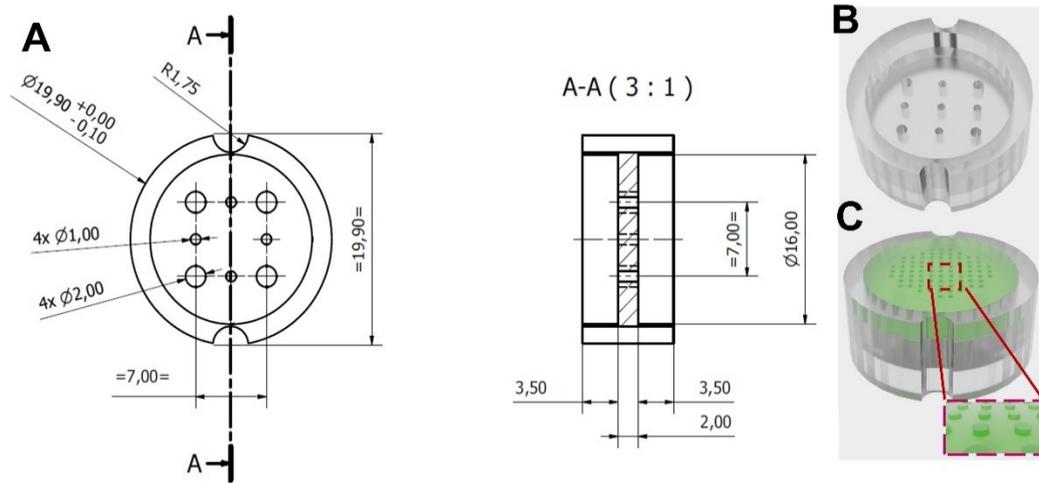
Technical drawing (upper and side views) of the lower part of the soft confiner (Element #2 in fig. SI 1). An opening is left for microscopic viewing.
